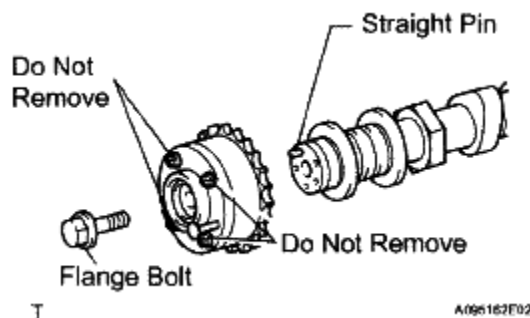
Identifying Flange Bolt & Camshaft Timing Exhaust Gear
